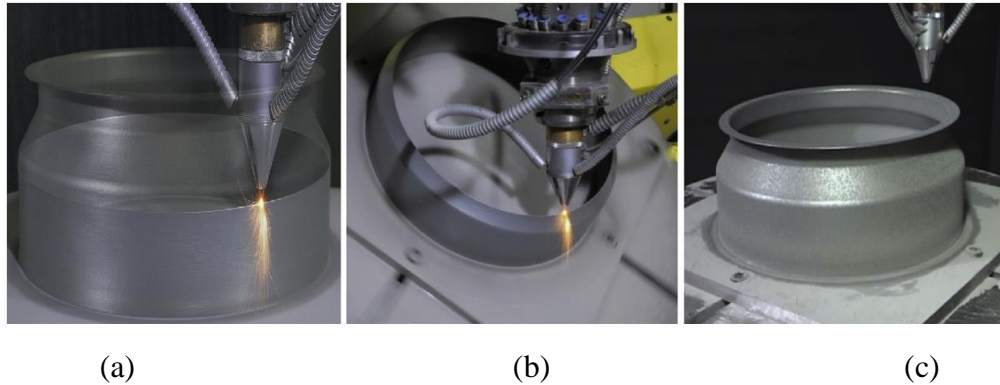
IN718 helicopter engine combustion chamber fabricated by a five-axis laser DED process. (a) Deposition showing the 2.5-dimensional tool path; (b) Multiaxis deposition; (c) Finished part [3].
